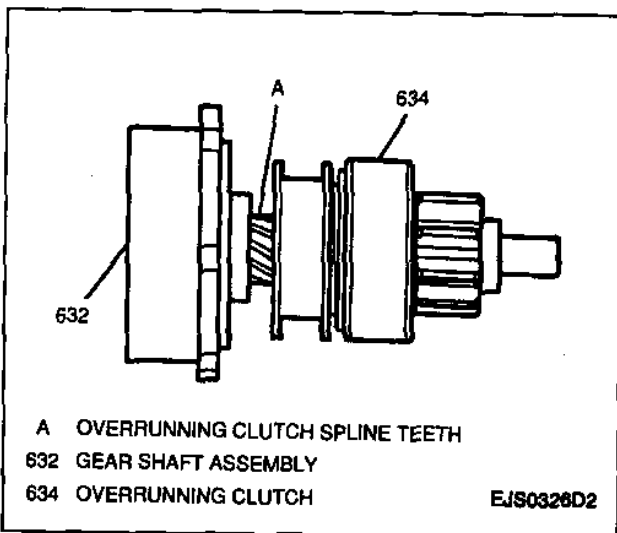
Inspecting Overrunning Clutch Spline Teeth
